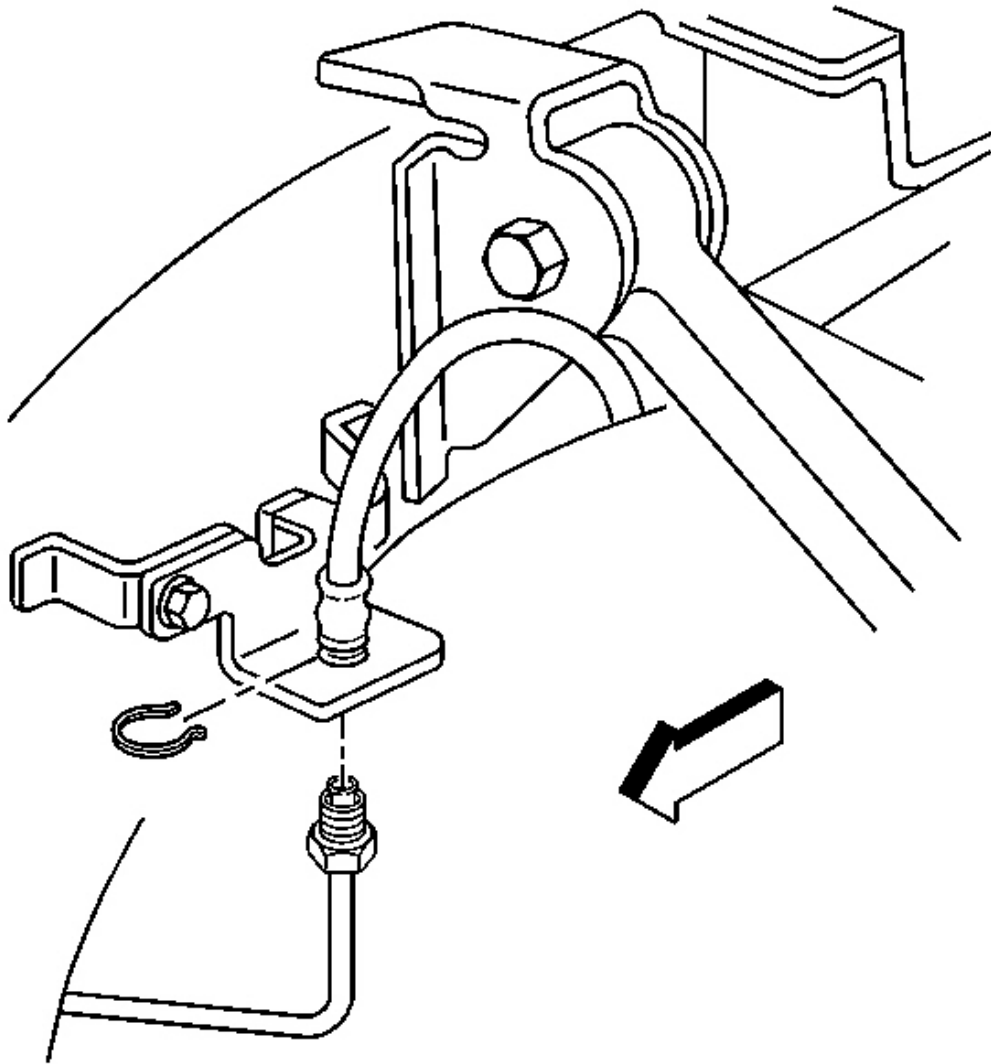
Brake Hose Retainer To Brake Hose At Hose Bracket
